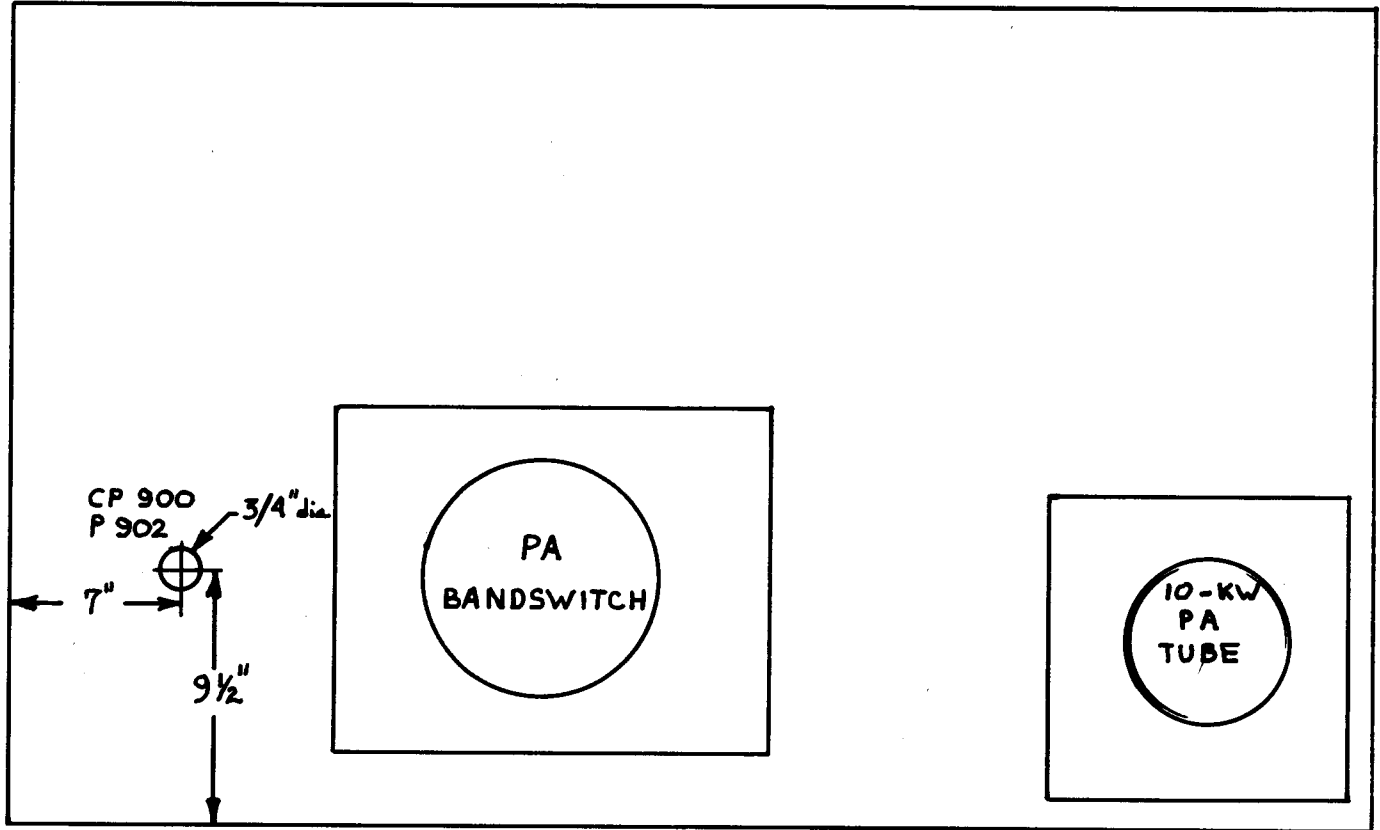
MAIN FRAME PA CHASSIS, TOP VIEW
